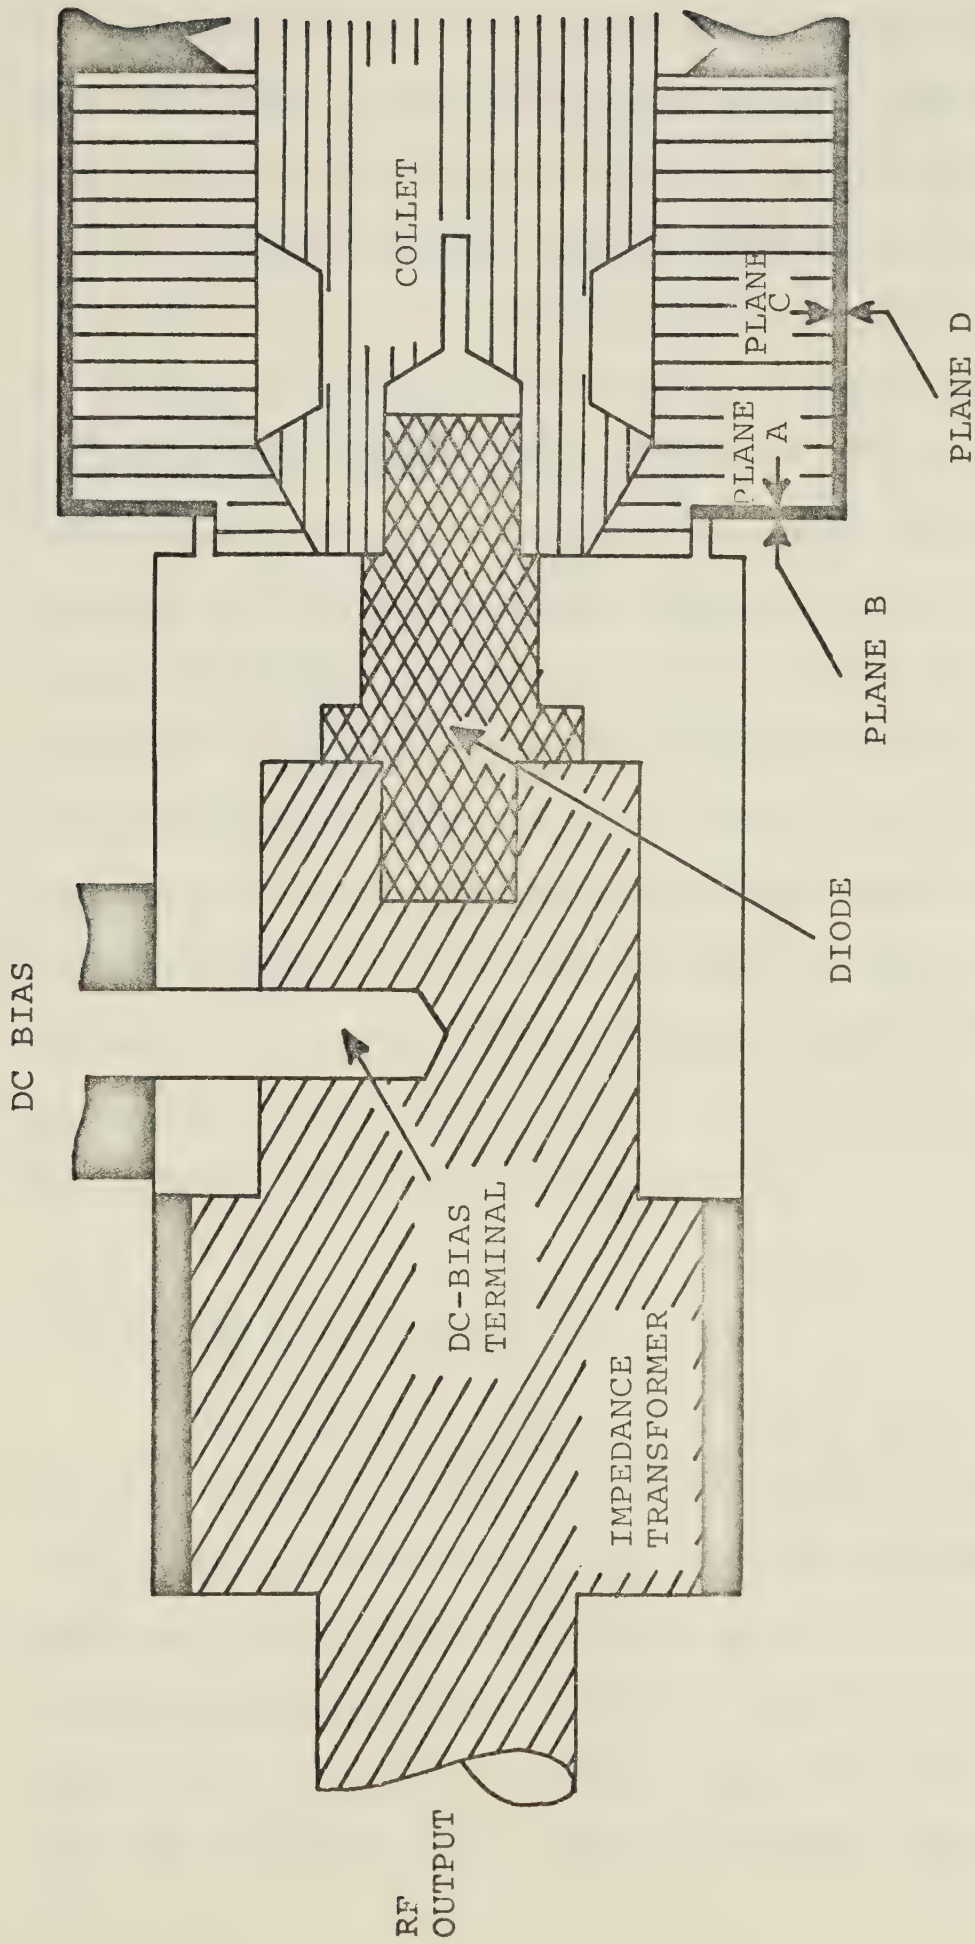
Cross-sectional view of the 7mm coaxial cavity with end mounted Impatt diode.
